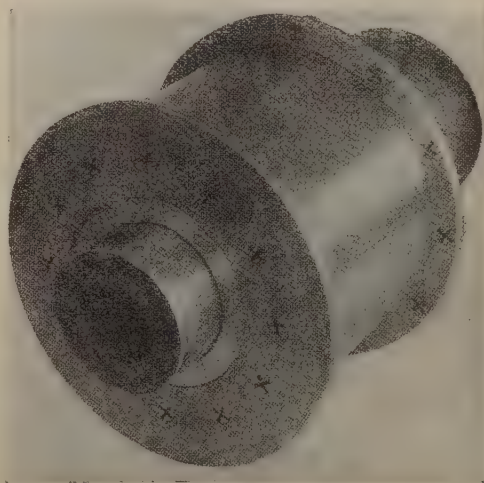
The Timken roller-bearing assembly on the main crank pin.
